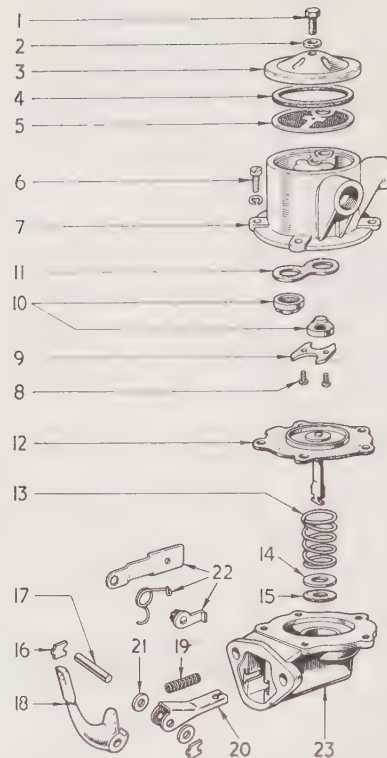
3 Components of fuel pump, small type for 4-cylinder engines.
